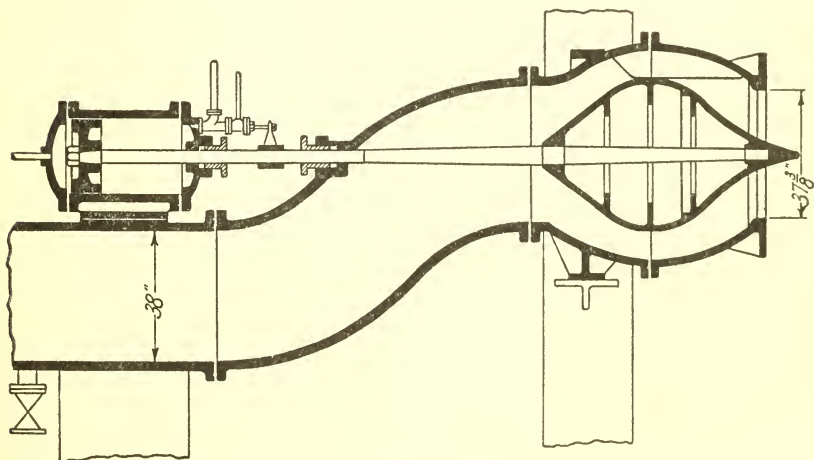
Needle valve, 38 inches in diameter, South Tunnel, Roosevelt Dam.
